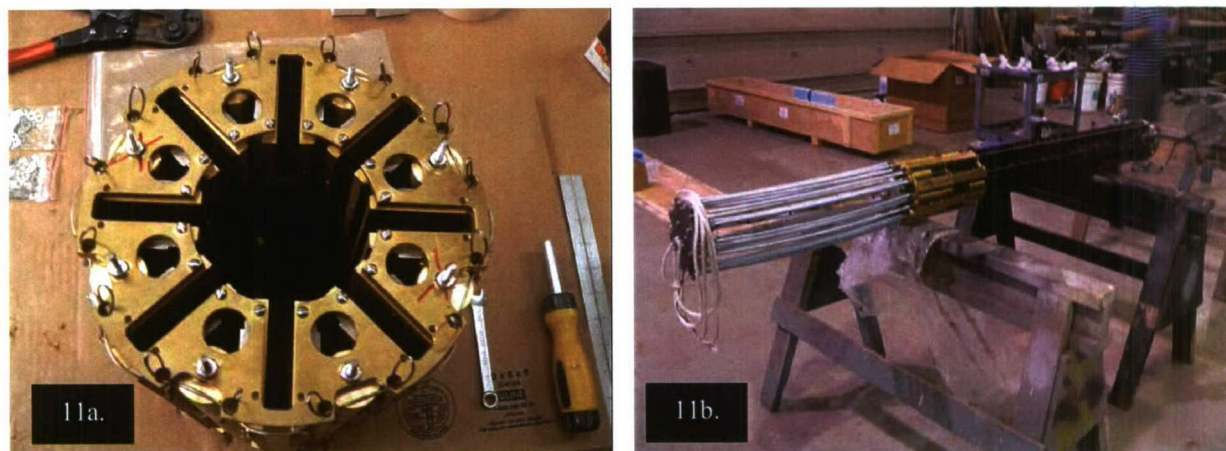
20W device used for OTRC test. 11a. Magnet car with radial design. 11b. Final generator assembly with multiple springs, magnet car and matching coil cartridge.
